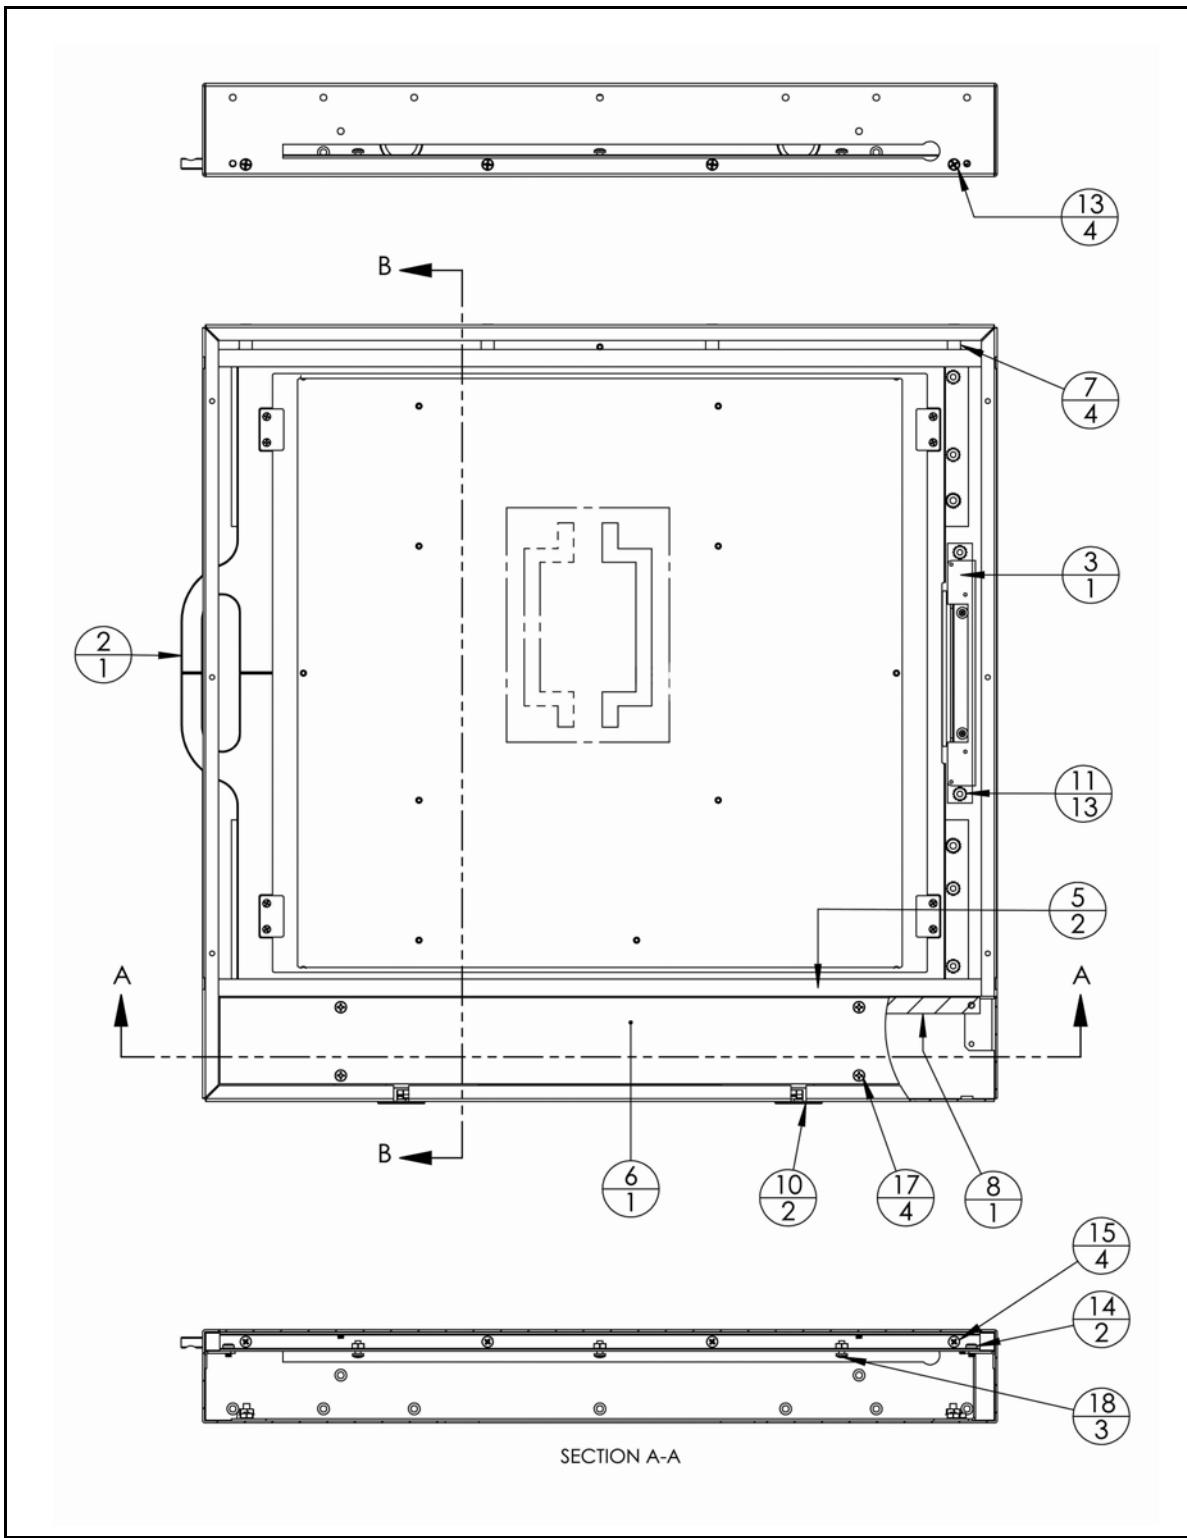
Toshiba Panel Cabinet Assembly (112-5526G1) Part A
